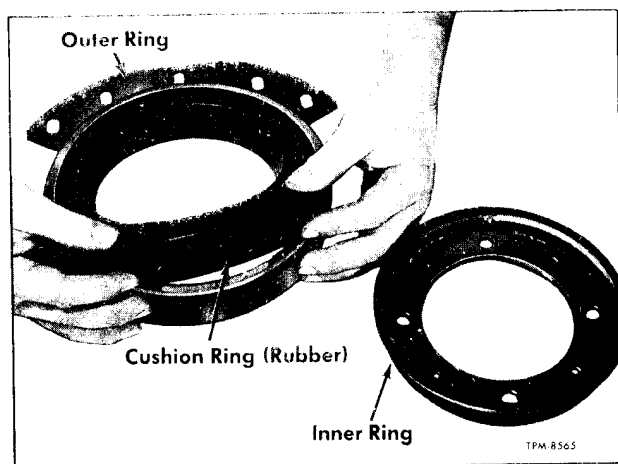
Replacing Compressor Rear Mounting Rubber Ring
